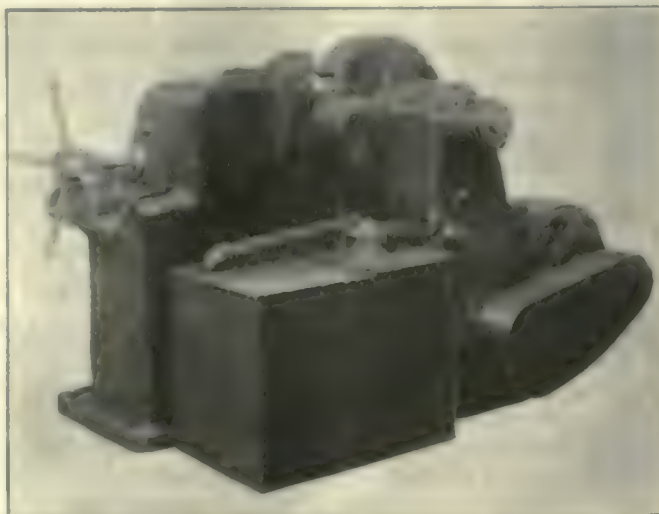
REAR VIEW OF CINCINNATI CENTERLESS GRINDING MACHINE WITH MOTOR DRIVE
